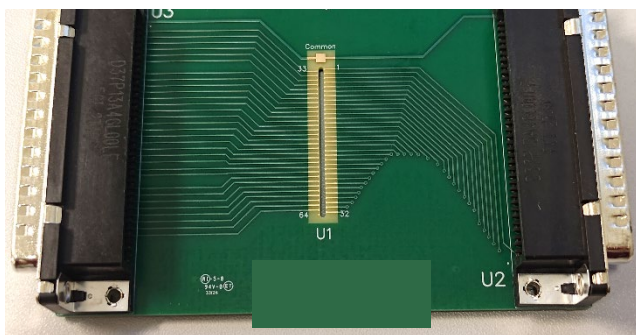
Test Board with bond side footprint and optical opening for bare die image sensor
